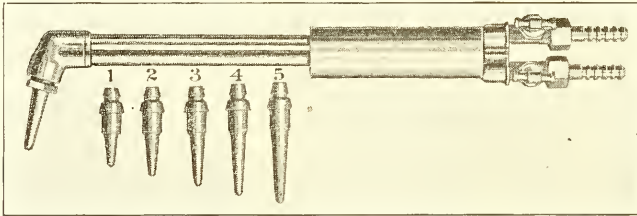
The Davis-Bournonville Style C Positive-Pressure Welding Torch.
